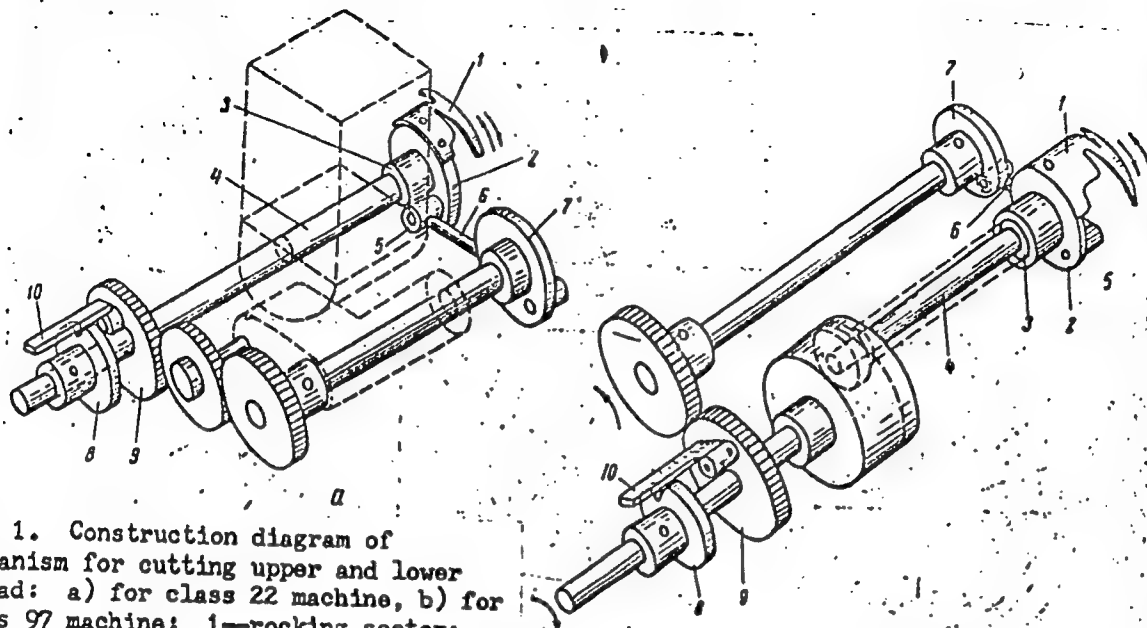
Construction diagram of mechanism for cutting upper and lower thread: a) for class 22 machine, b) for class 97 machine: 1--rocking sector; 2--plate; 3--shuttle shaft sleeve; 4--shuttle shaft; 5--rocking plate pin; 6--guide; 7--crank; 8--disk for engaging cutting mechanism; 9--cutting mechanism engaging pin; 10--engaging catch.
